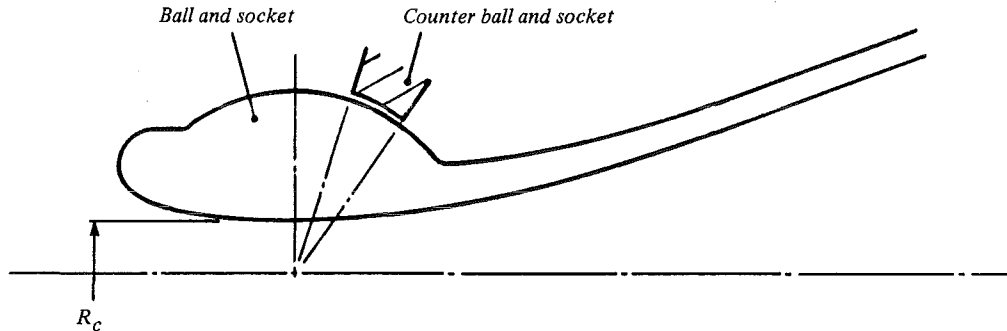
BALL AND SOCKET - PRINCIPLE
